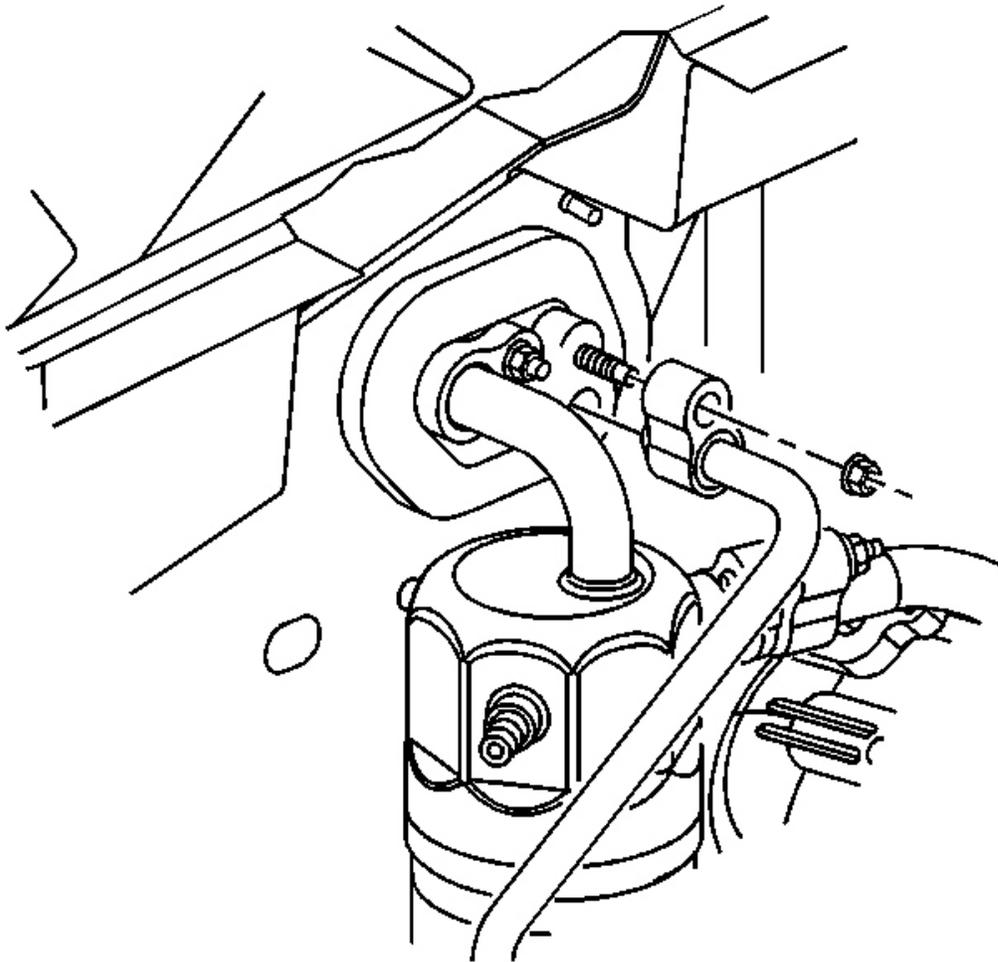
Removing/Installing Evaporator Tube At Evaporator
